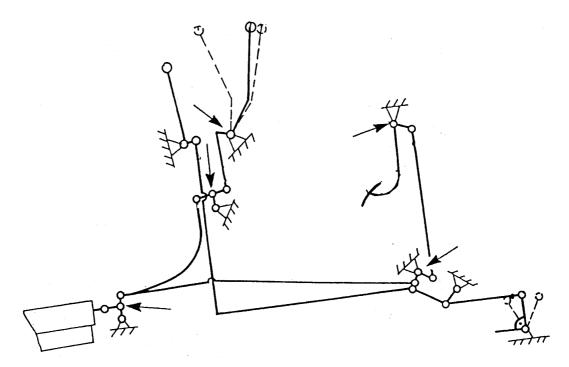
Hand and Foot Control Linkage Lubrication Fittings
